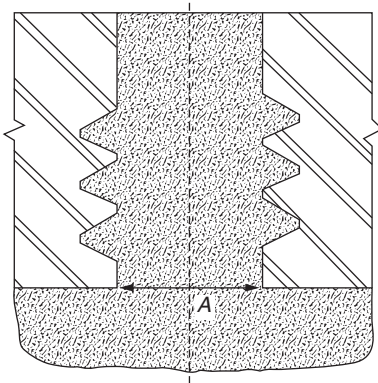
An American standard moulded external thread. The thread may be unscrewed from the mould or a split mould may be used. The thread starts and stops abruptly. The unthreaded bottom portion of the stud should have a diameter equal or greater than the major diameter of the thread.
